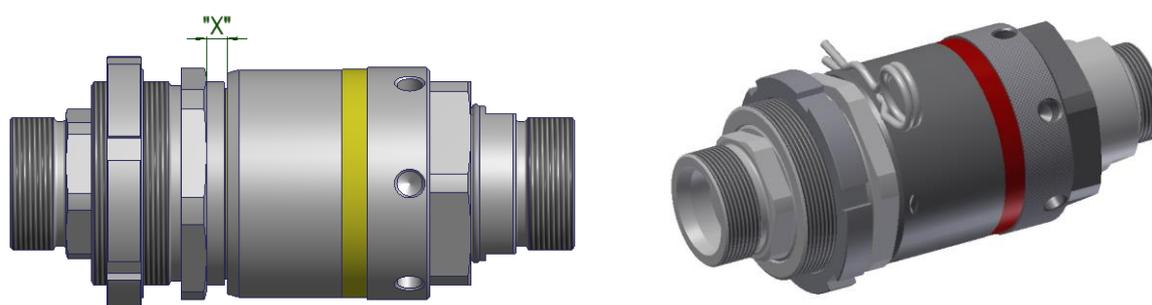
Diagram of coupling halves: Tighten to the stop with a tool.
